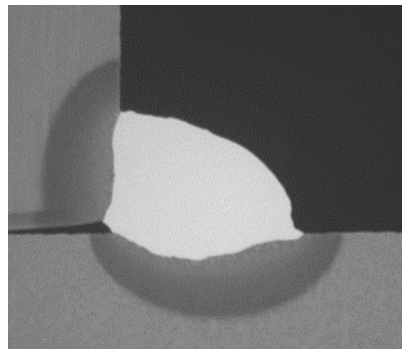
Typical welding cross section ($t = 10$ mm).
